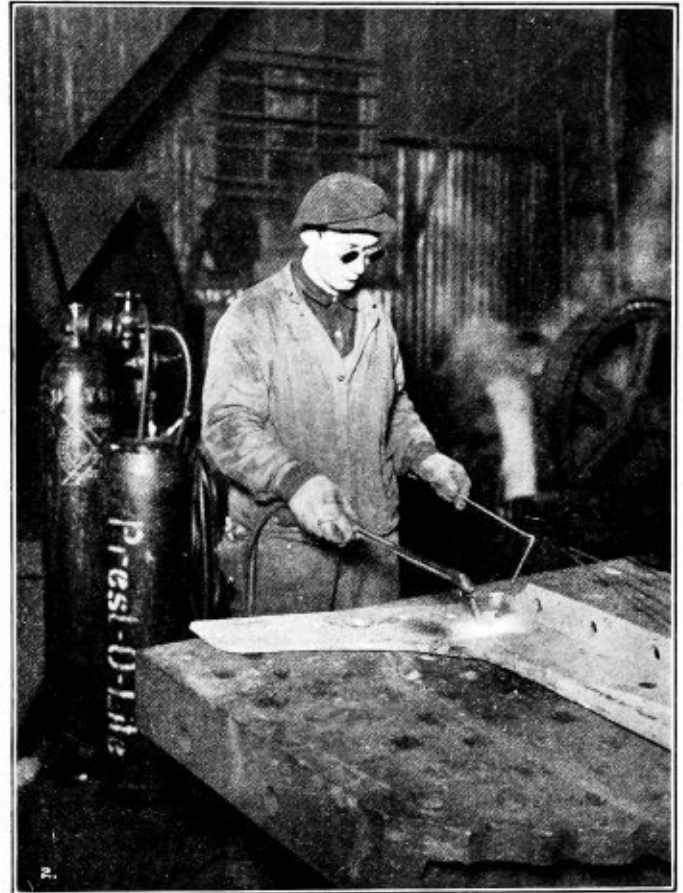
Welding Cracks in Iron Plates, Using Swedish Iron
